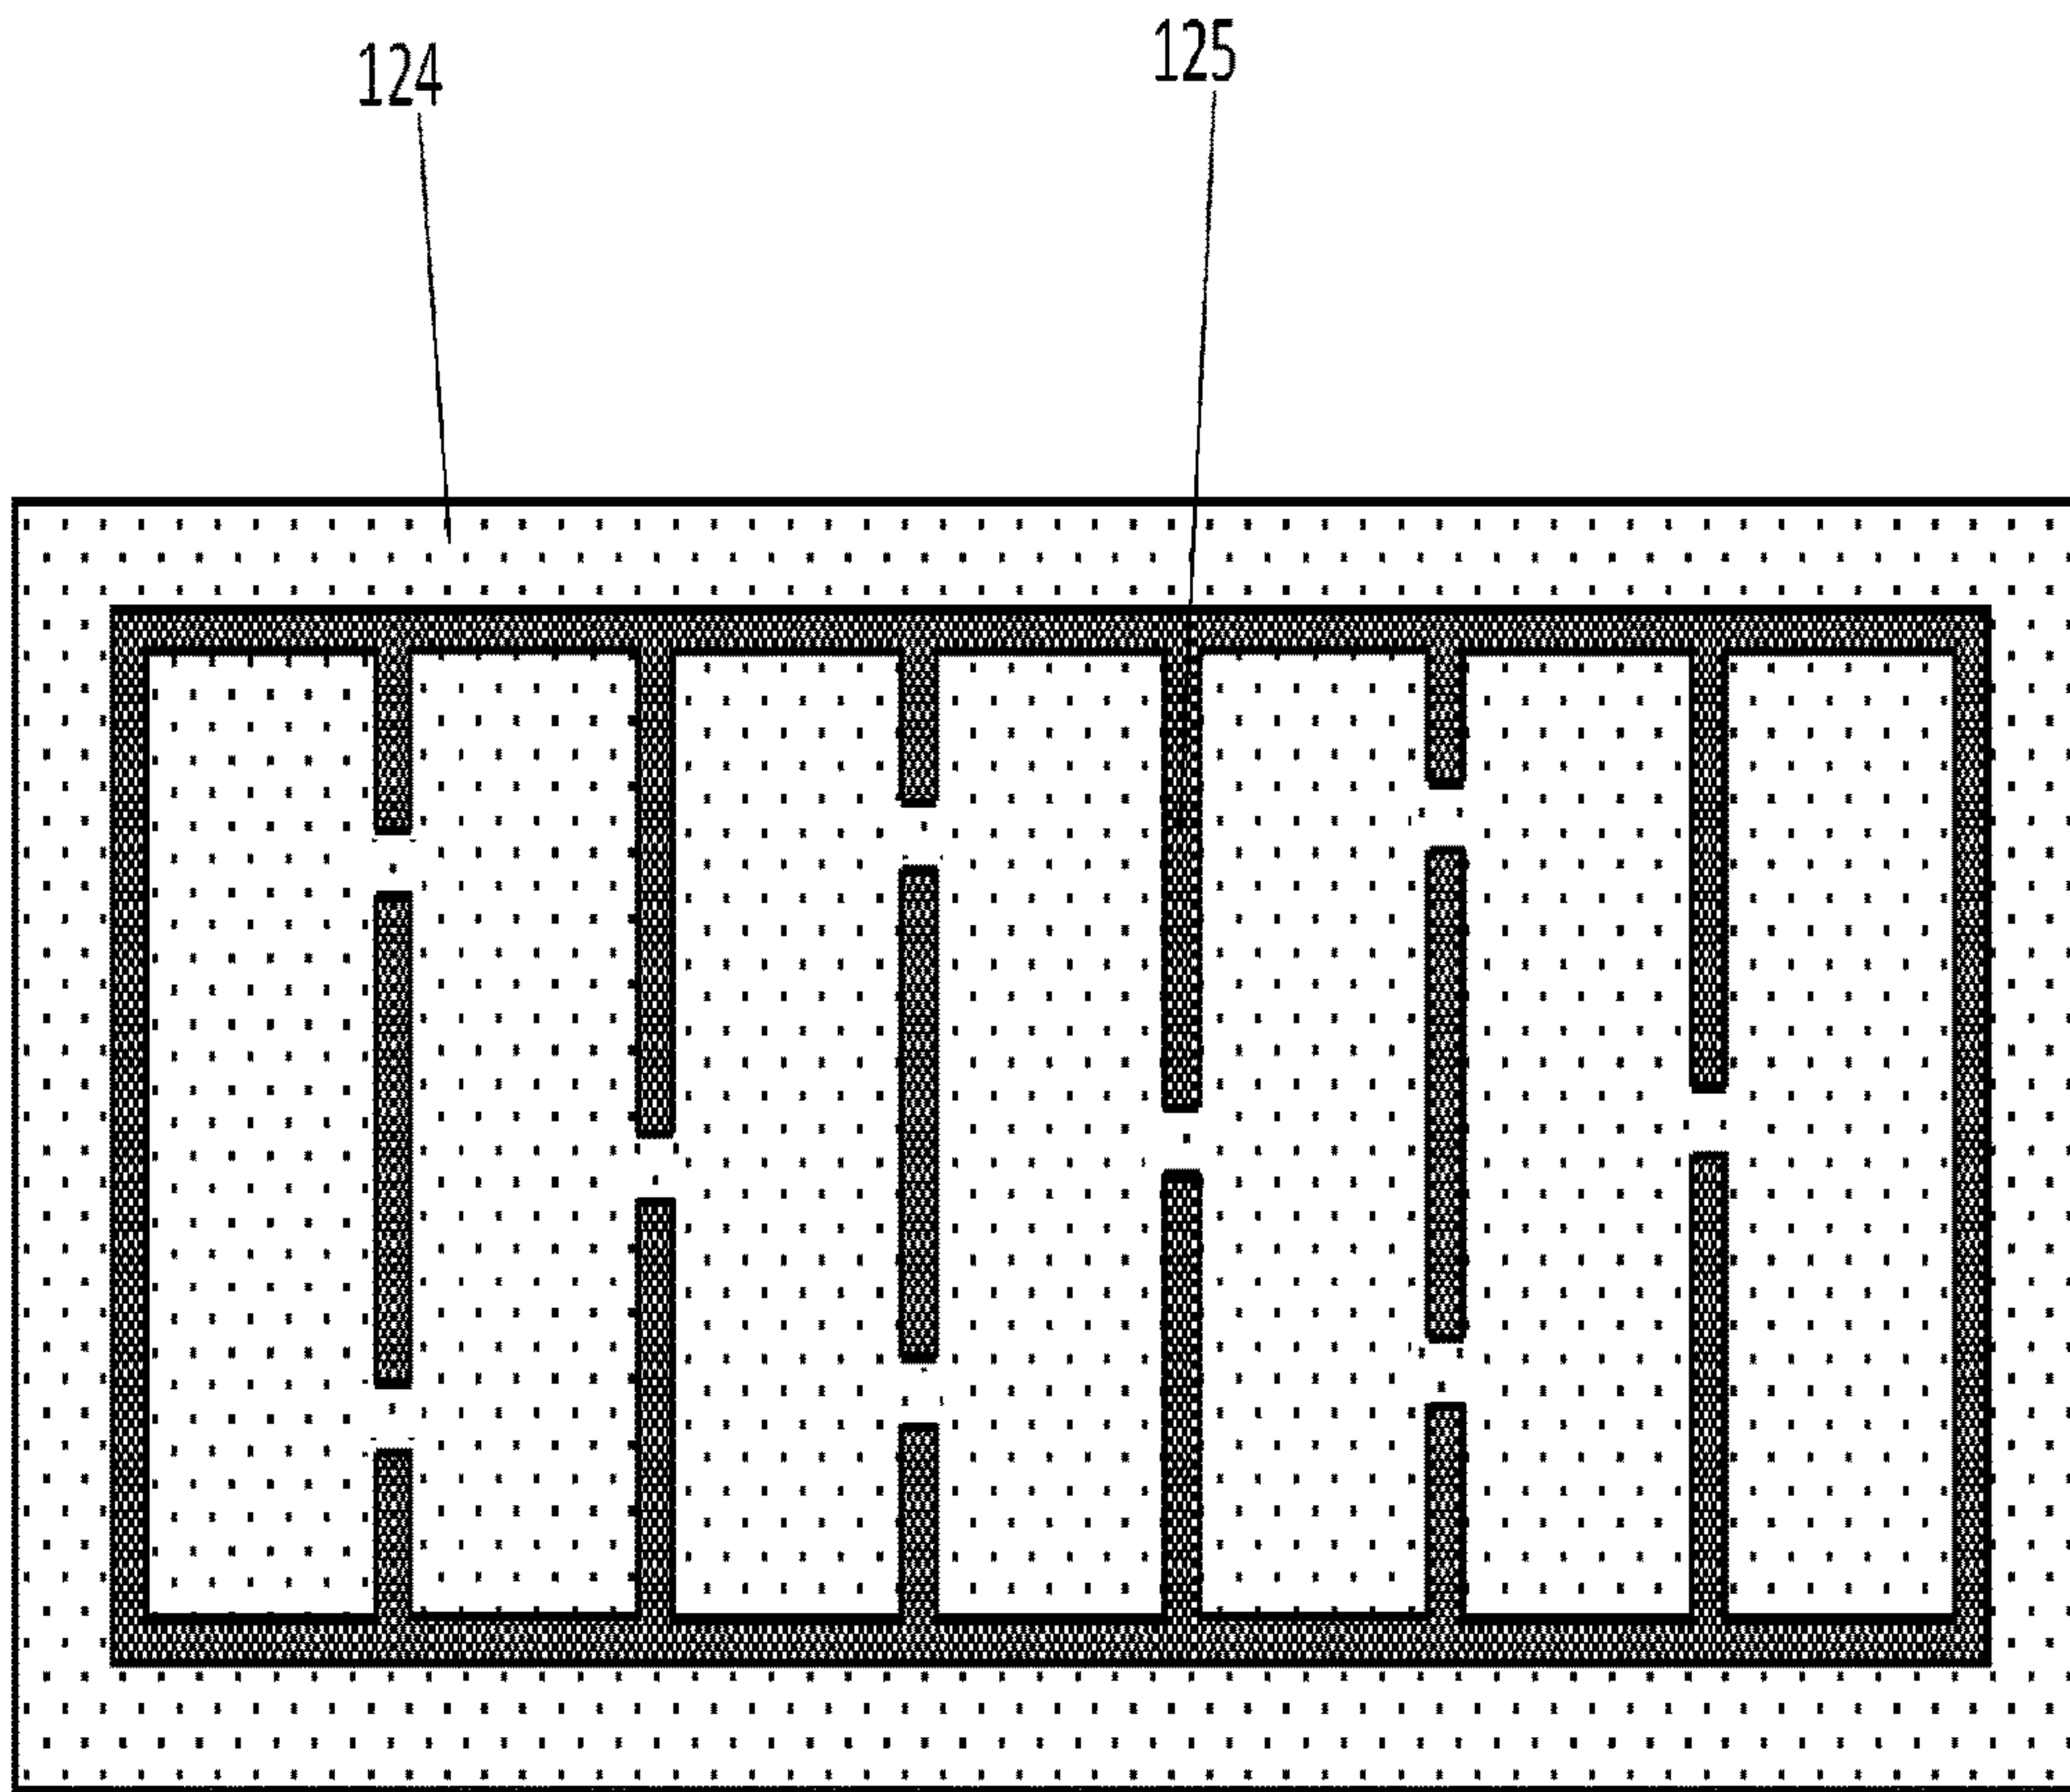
B - DIE: SIDE W/PATTERN, BOTTOM BLANK
